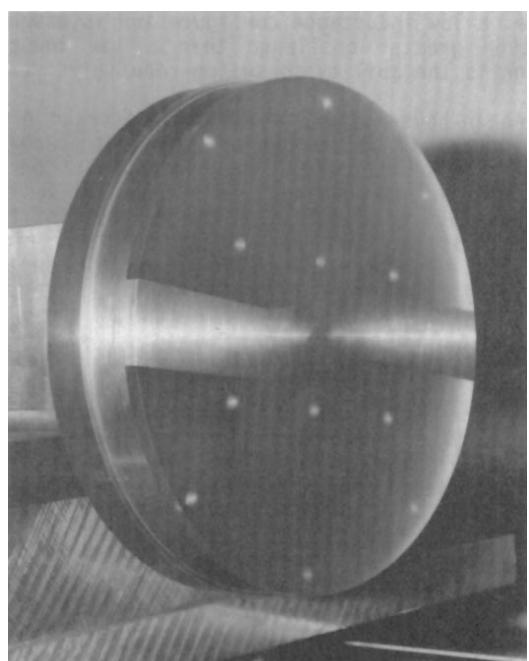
Rotor with mounting plate (left) and copper disk (right). Non-conductive inserts are machined into the copper disk face (top and bottom) to expose the shorting bar.
